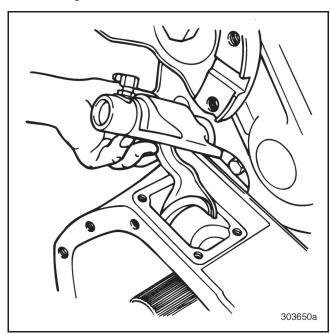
Installing Differential Lockout Air Shifter Housing and Shift Fork Assembly
